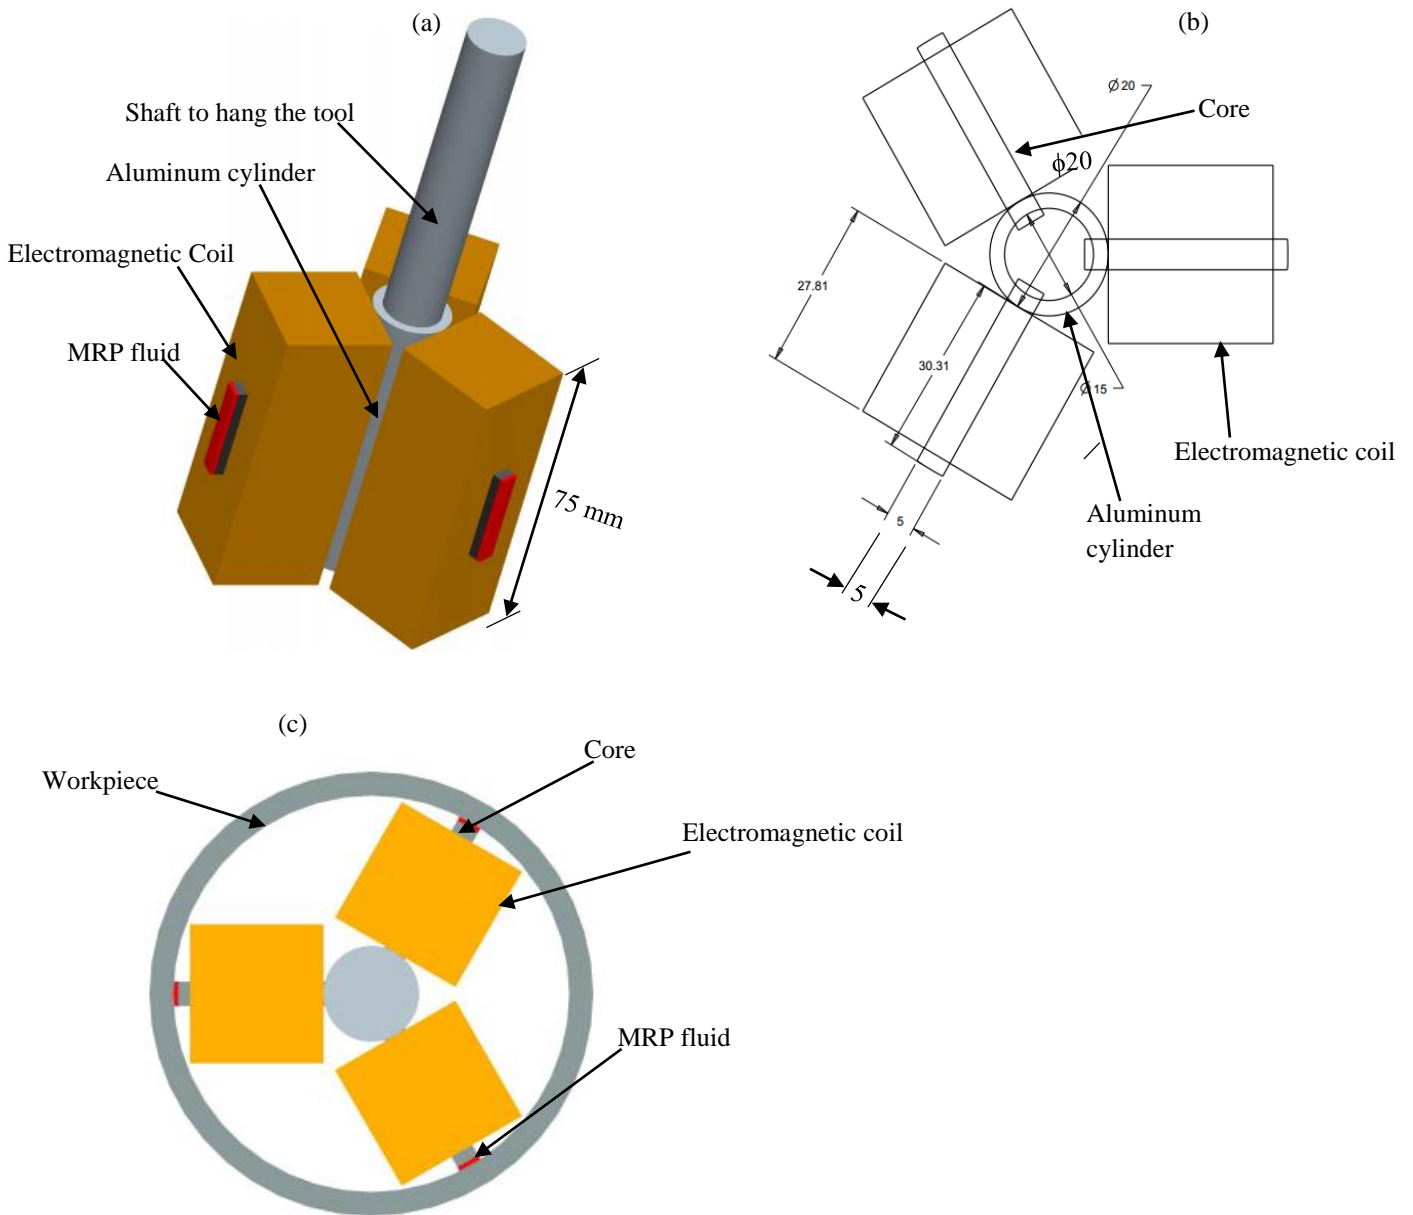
(a) Standard 3-D view of designed present magnetorheological (MR) honing tool (b) top frame view of the present designed magnetorheological (MR) honing tool and (c) Top view of present magnetorheological (MR) honing tool MRP fluid and workpiece
